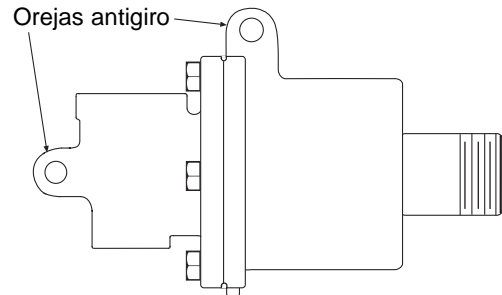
The 3000 Series Joints (1" and larger) have lugs on both head and body. Joints smaller than 1" have lugs on head only.
